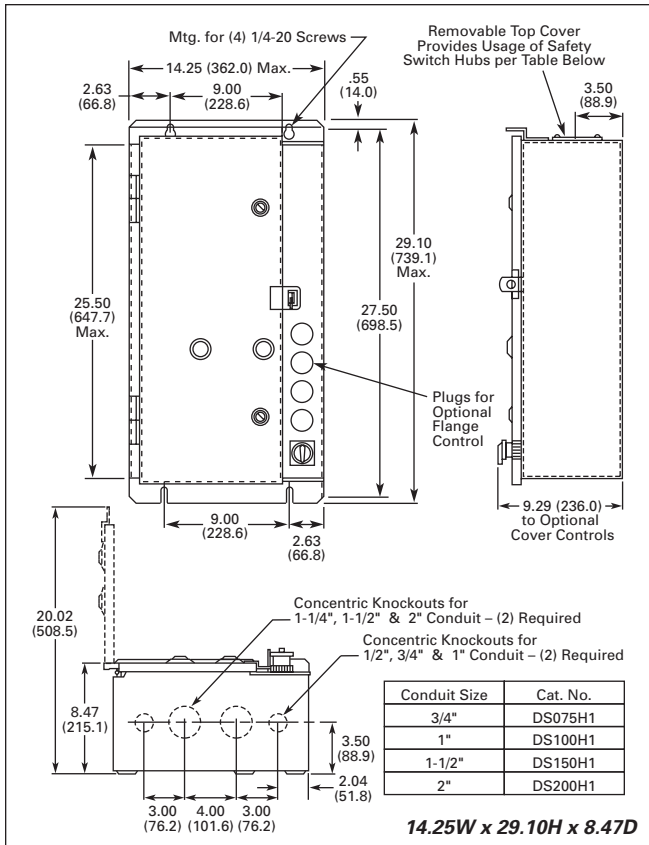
Box 8, Type 3R — Approximate Dimensions in Inches (mm)
